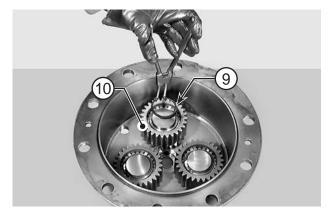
Lock gears (10) into position by installing the snap rings (9).
